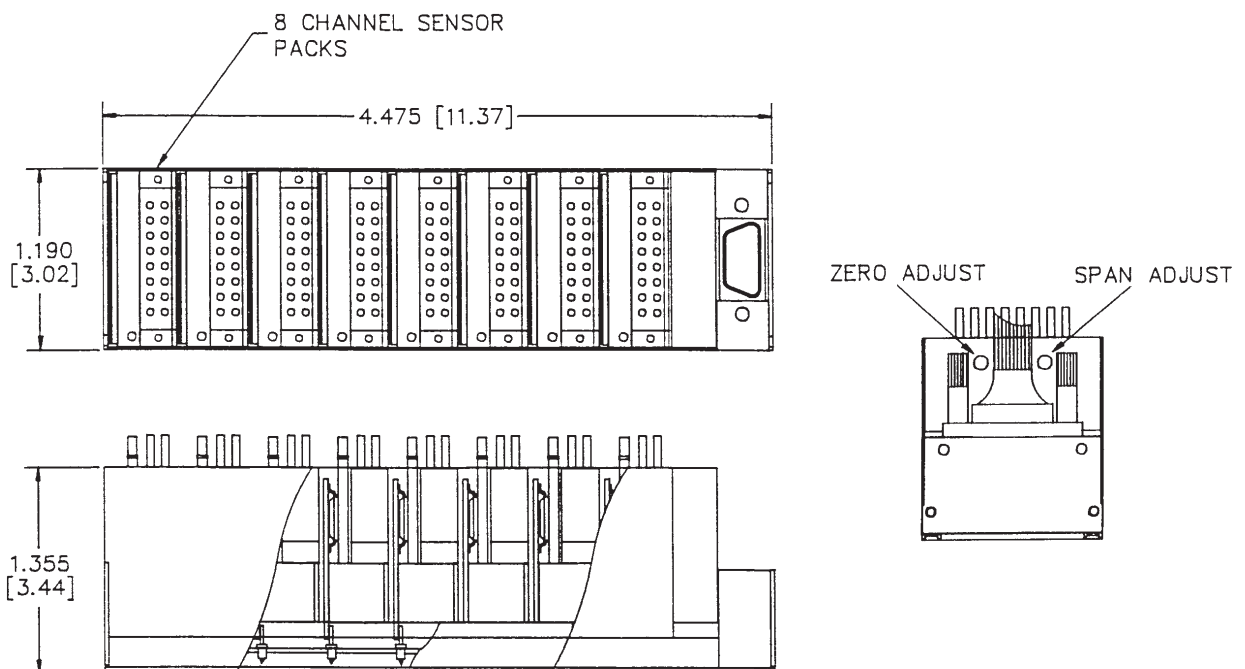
EARLY ZOC33/64PxX2 DIMENSIONS [INCHES(CM)]
